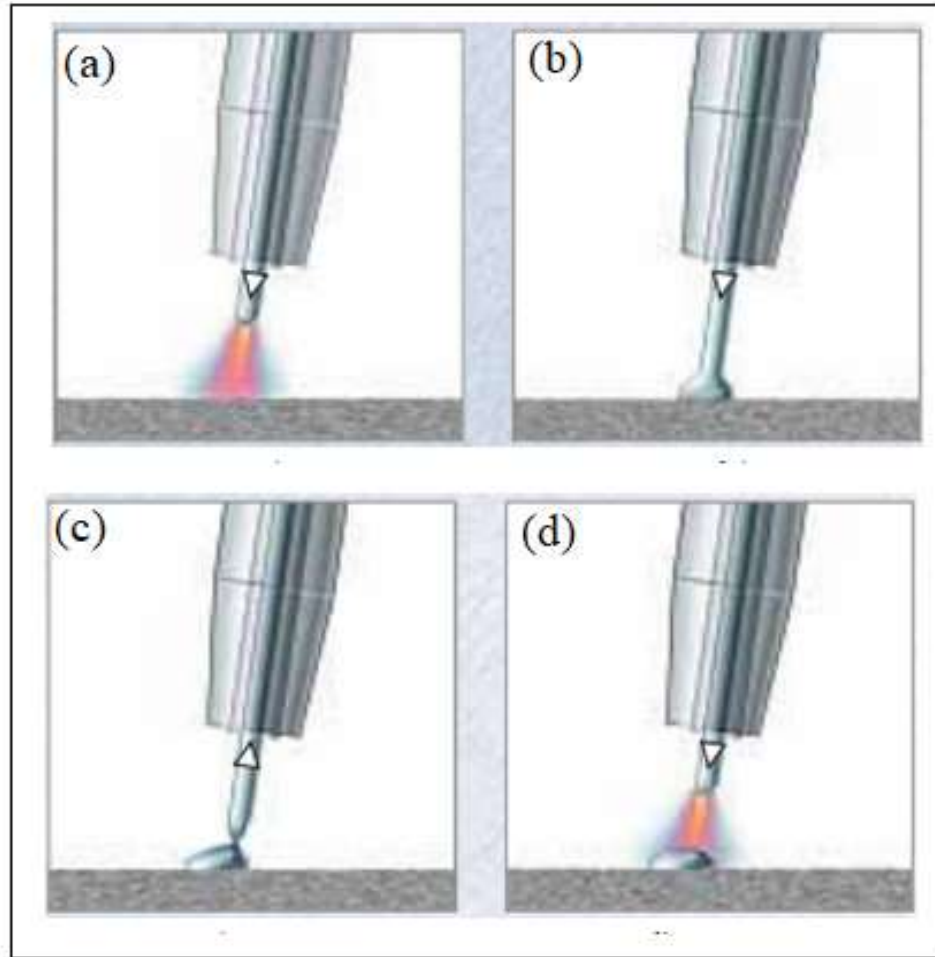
2 Demonstration of CMT welding arc [Fronius, (2004)]
